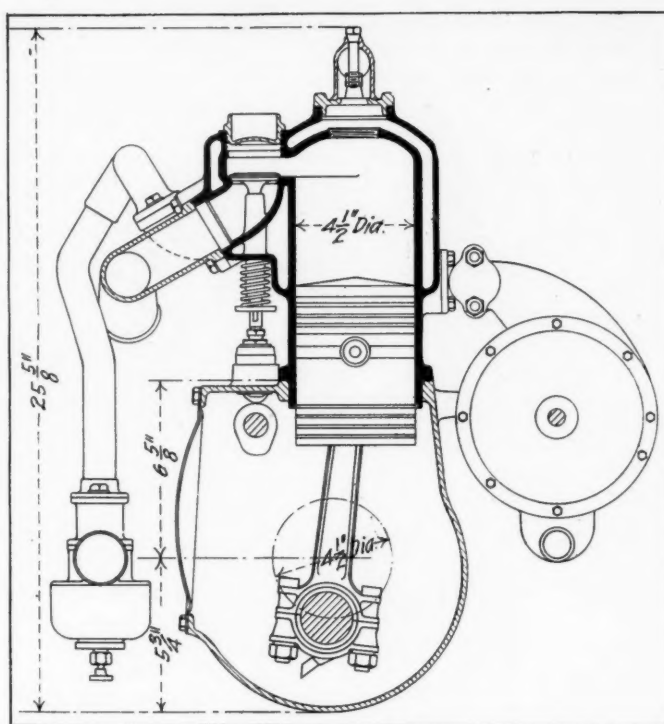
Rambler 1913 cars will have longer connecting-rods and larger valves
